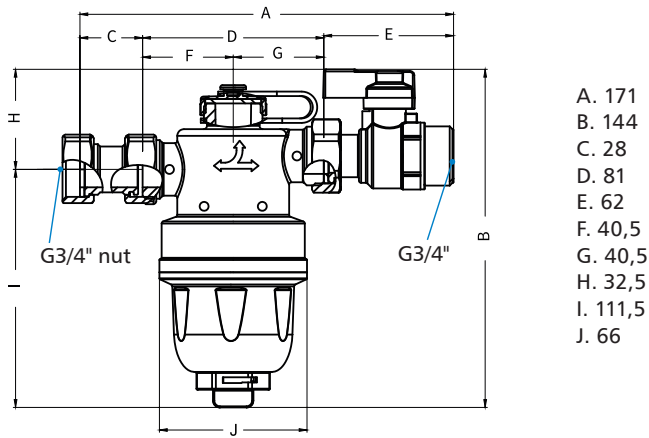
Dimensions of the ADS 110 compact magnetic dirt separator
